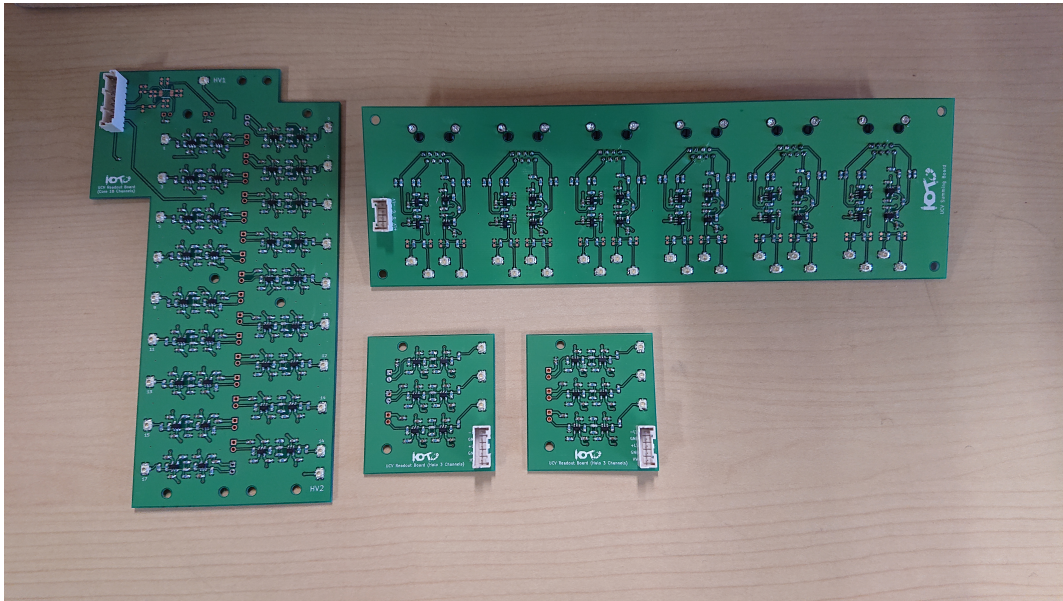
Front-end core board (right), front-end halo boards (top left), buffer board (bottom left).
